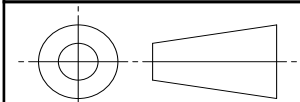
FITTINGS (ENLARGED VIEW)
